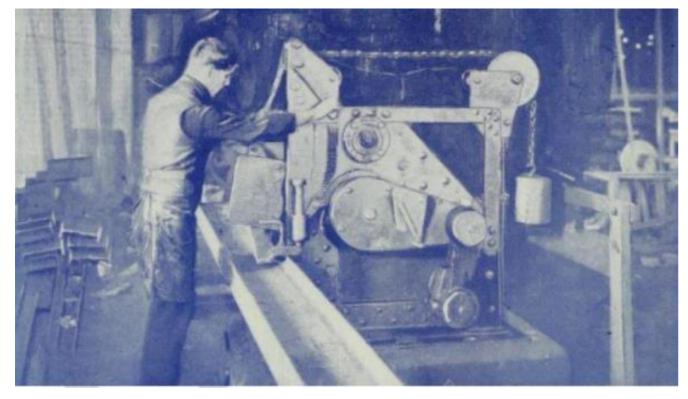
'Snipping through a Great Steel Joist', White Bay Steel Works, 1908. *Source:* 'The Making of a Steel Girder', *Building 2*, no. 10 (15 June 1908, 36).
